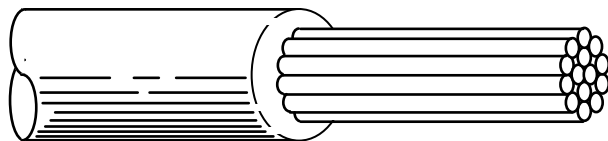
Acceptable Mechanically Stripped, Clean Appearance.
